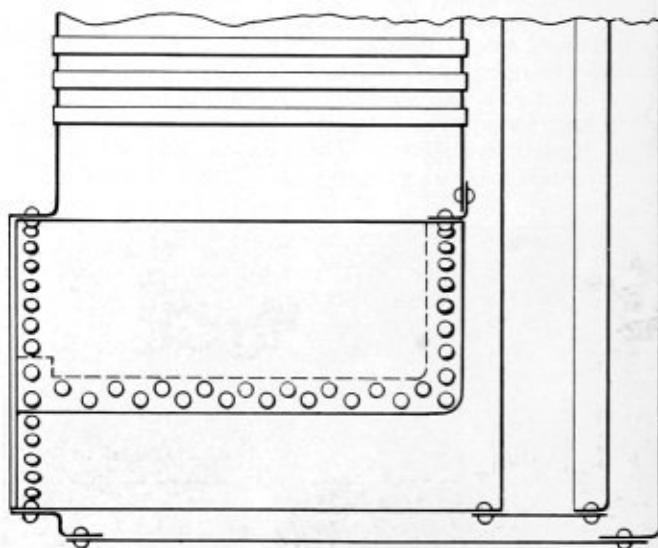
Repair to Furnace Was Made by Riveting a Patch to Rear End, Front Head and Along the Furnace Shell as Indicated by Dotted Line
